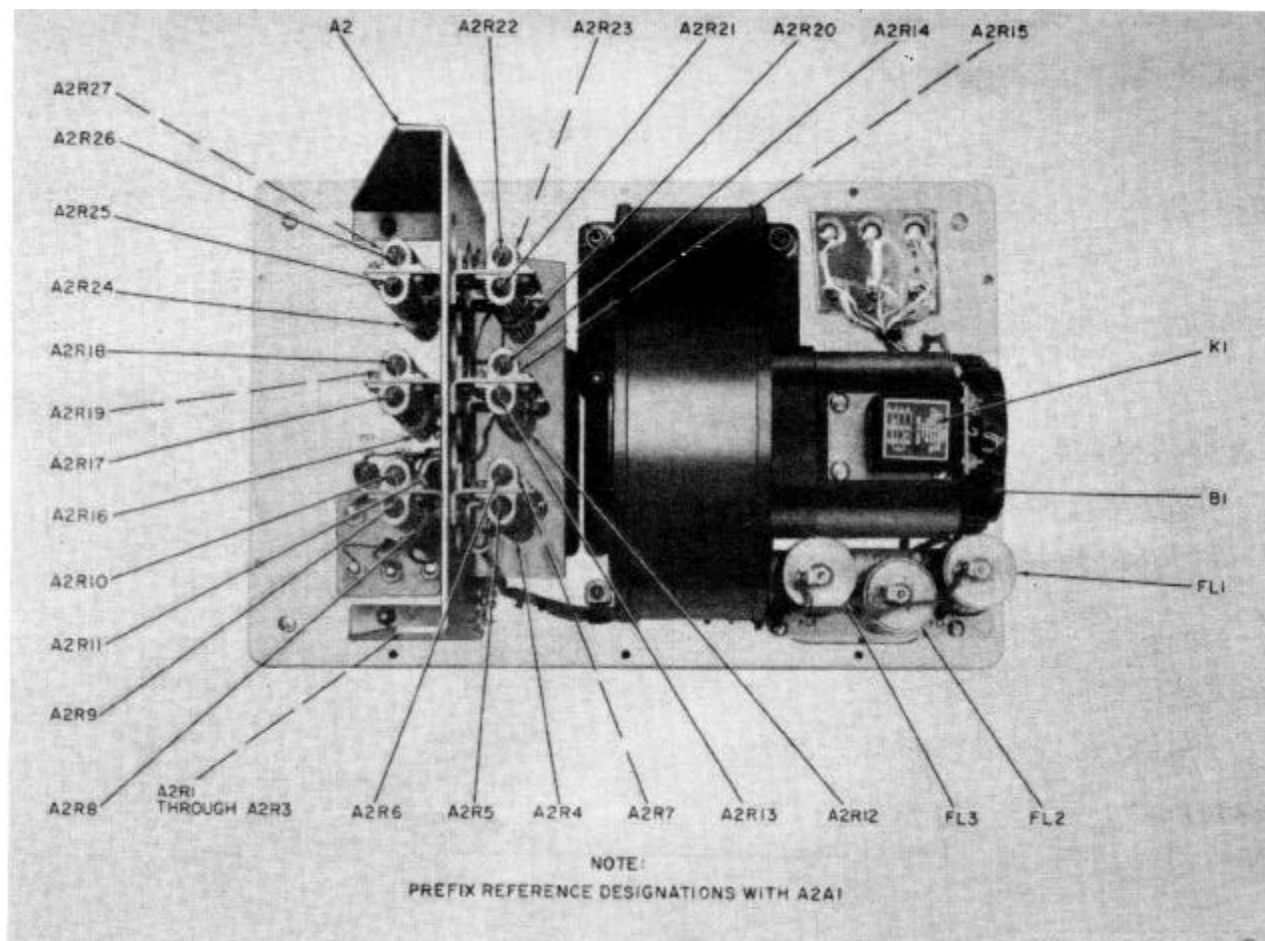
(2). Power limiter and blower, panel and component assembly A2A1 (sheet 2 of 2).
